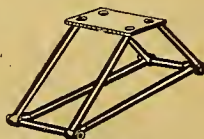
The auxiliary frame in which the power unit is mounted.
